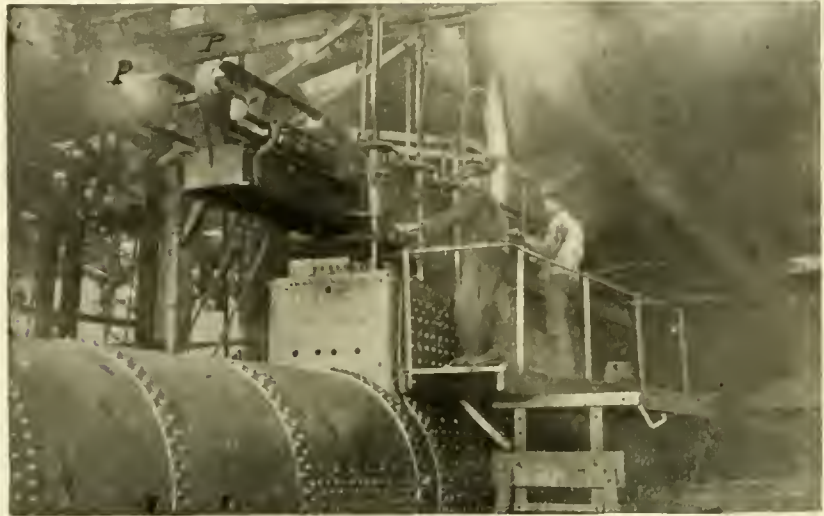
WELLS STAYBOLT-SEATING MACHINE.
